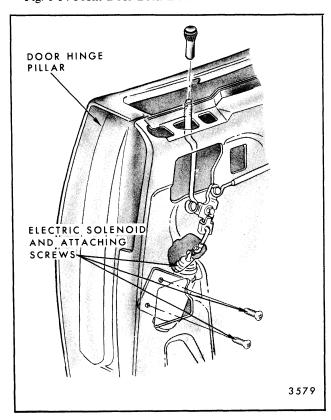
Rear Door Lock Electric Solenoid Installation "B" Styles Shown, "A" Styles Similar.
